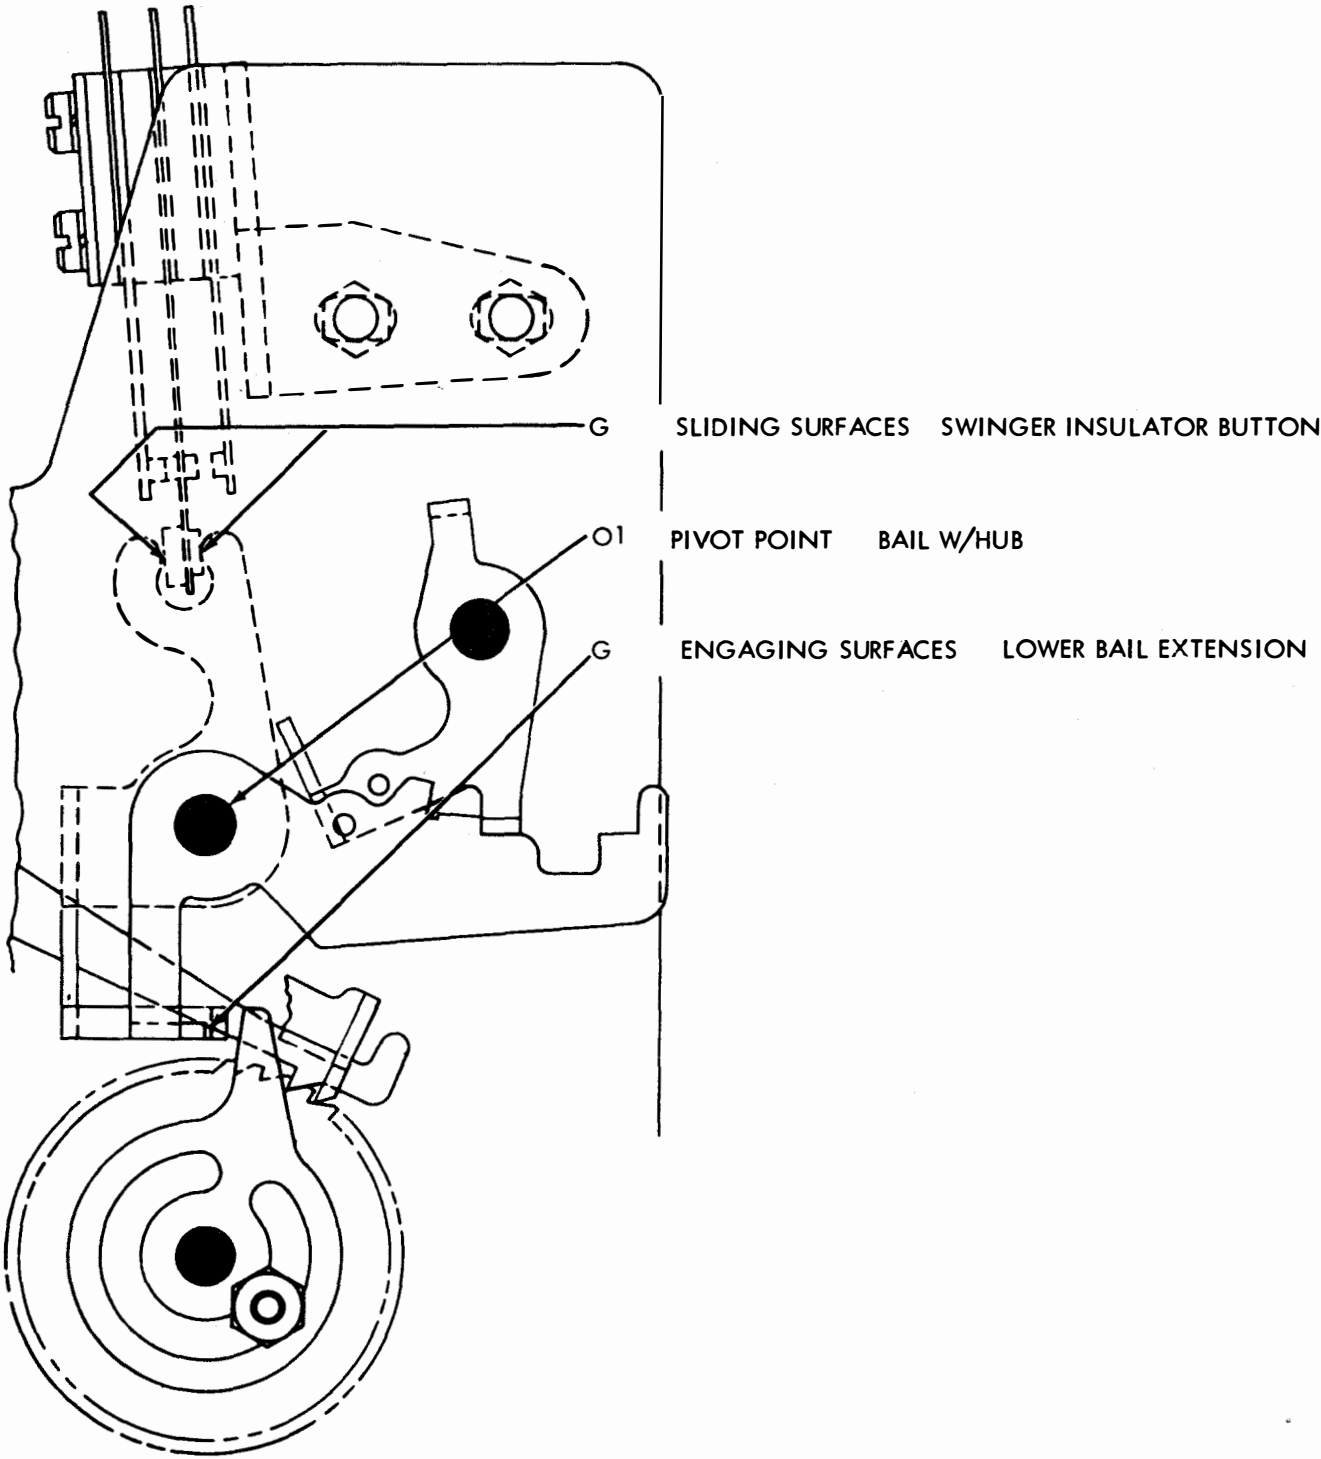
End of Tape Feed-Out Timing Contacts for Noninterfering LTRS and BLANK Tape Feed-Out Mechanisms
